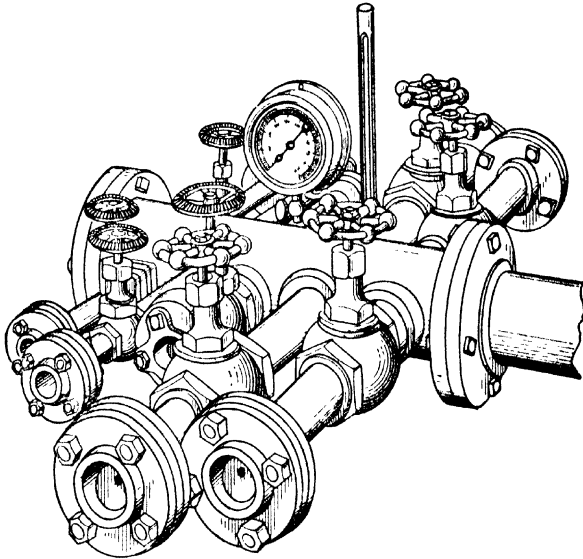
Manifold and Nozzles for Measuring the Discharge of Compressed Air
